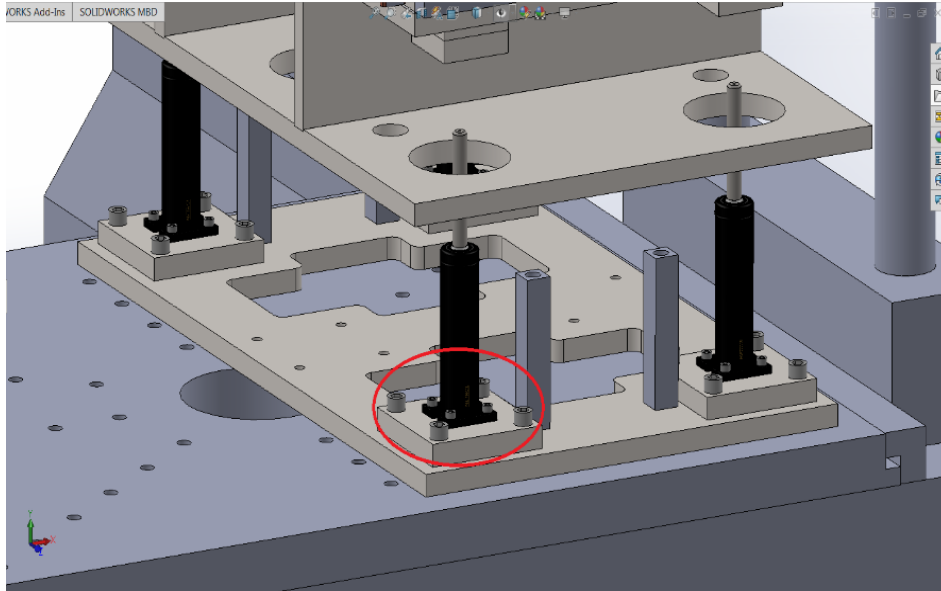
Re-location of the gas springs, mechanical stops and flanges
